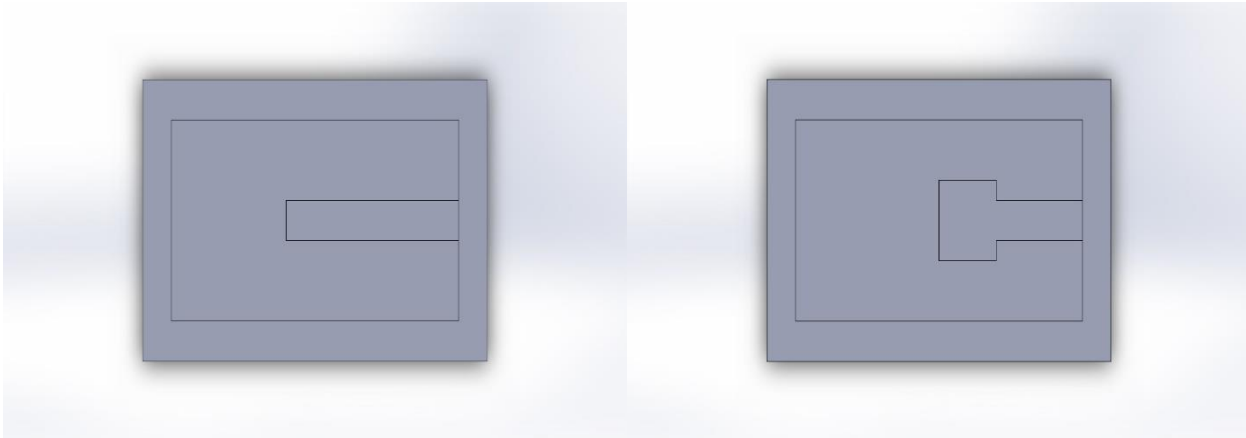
3D rendered model (Left) Inlet layer mold, (Right) Outlet layer mold.
